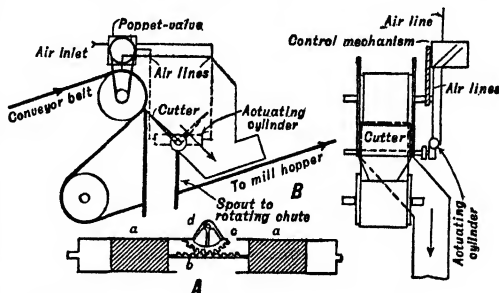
Arrangement of head sampler at Bird Dog mill.
